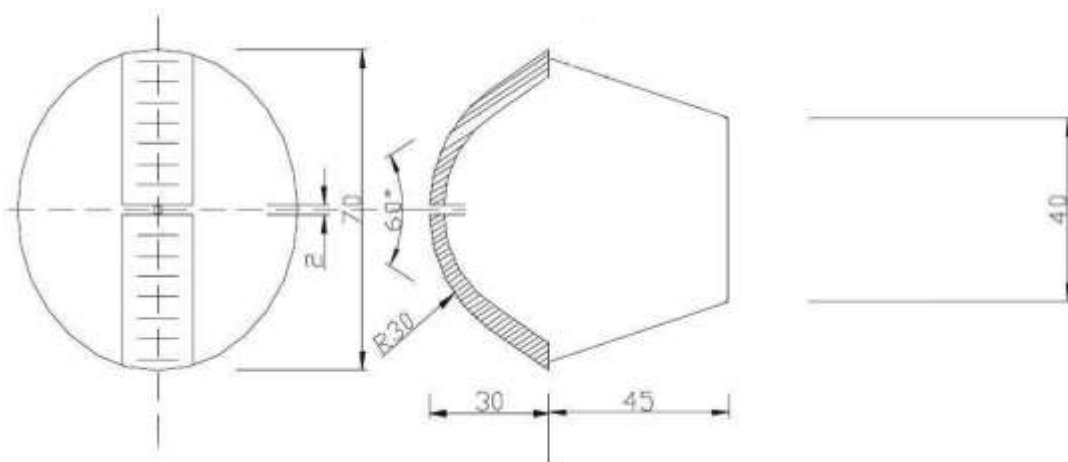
BLUFF BODY DIMENSIONS WITH FUEL INJECTION
